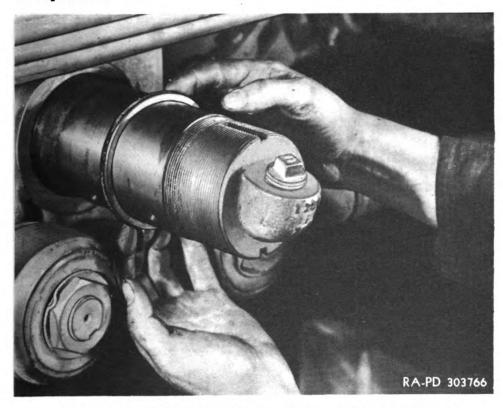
Removing Spring Seat Inner Cork Oil Seal
